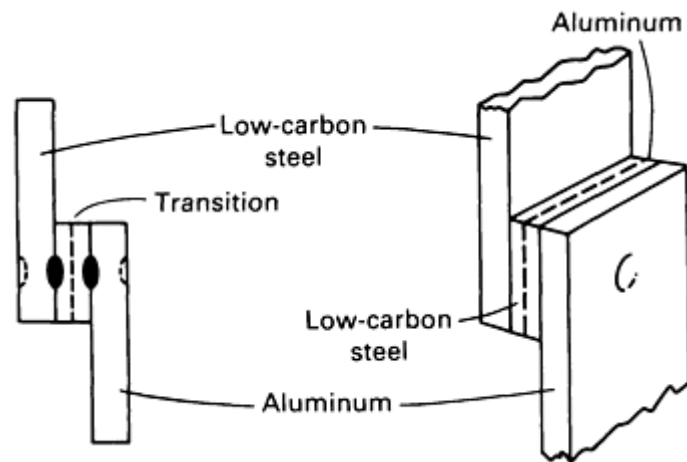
Illustration of a steel-clad aluminum transition insert used for joining aluminum to carbon steel
